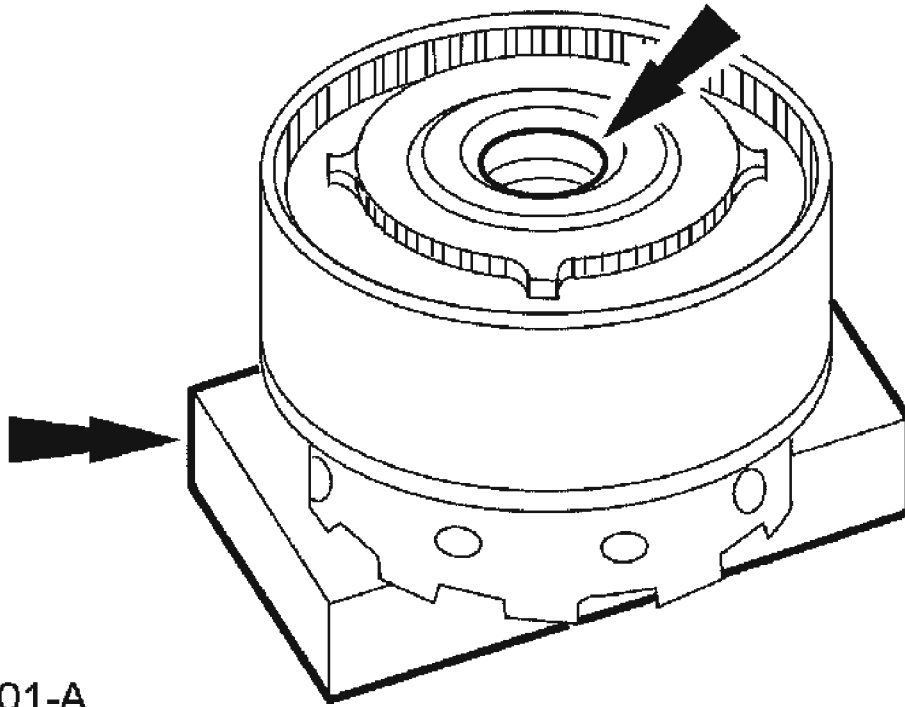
Identifying One-Way Clutch For Cracks And Damaged Splines
